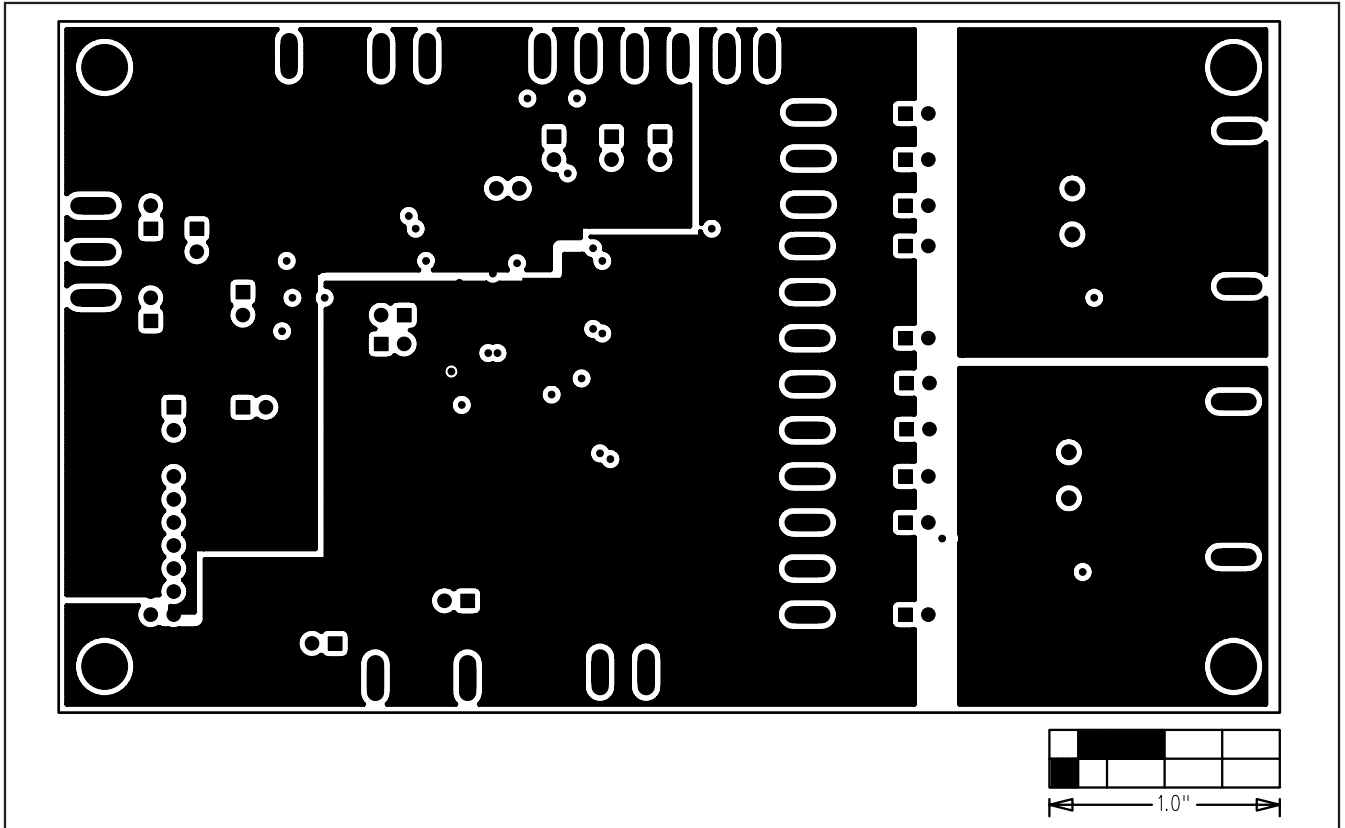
MAX1385 EV Kit PCB Layout—GND Layer 2
